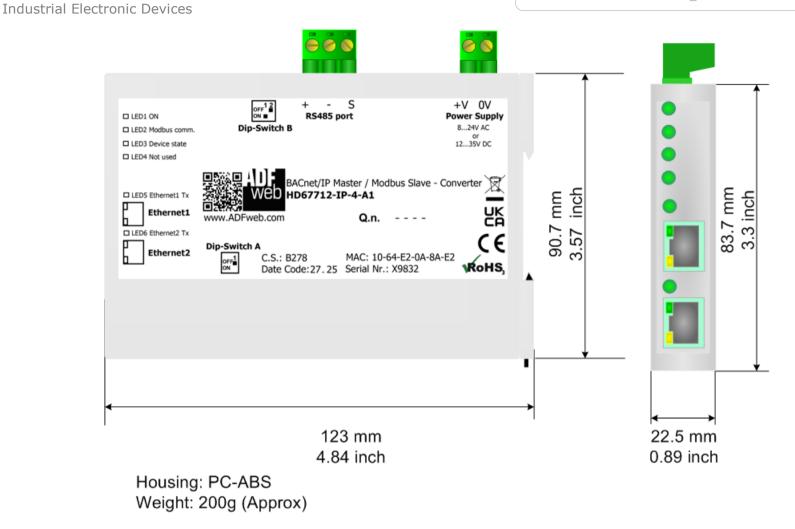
Mechanical dimensions scheme for HD67712-IP-4-A1
